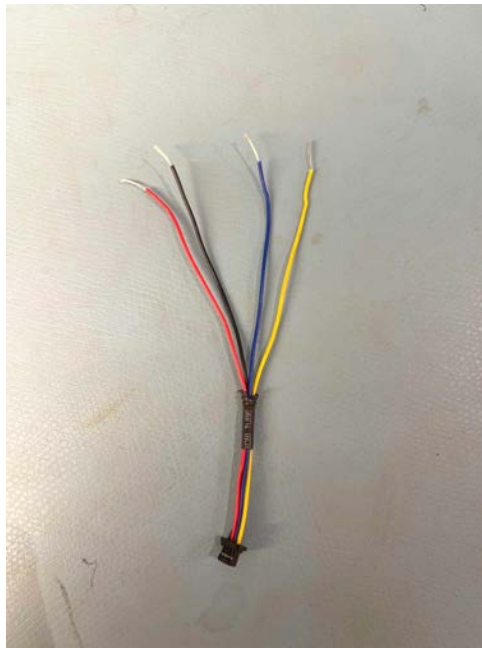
The wire stripper is used to strip off 5 mm of casing for each wire
